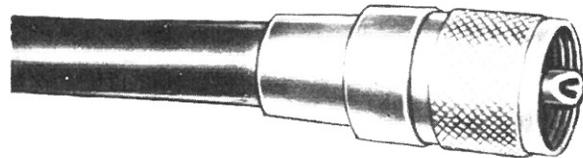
Plug and Cable with Set Screw in Plug Shell Tightened
